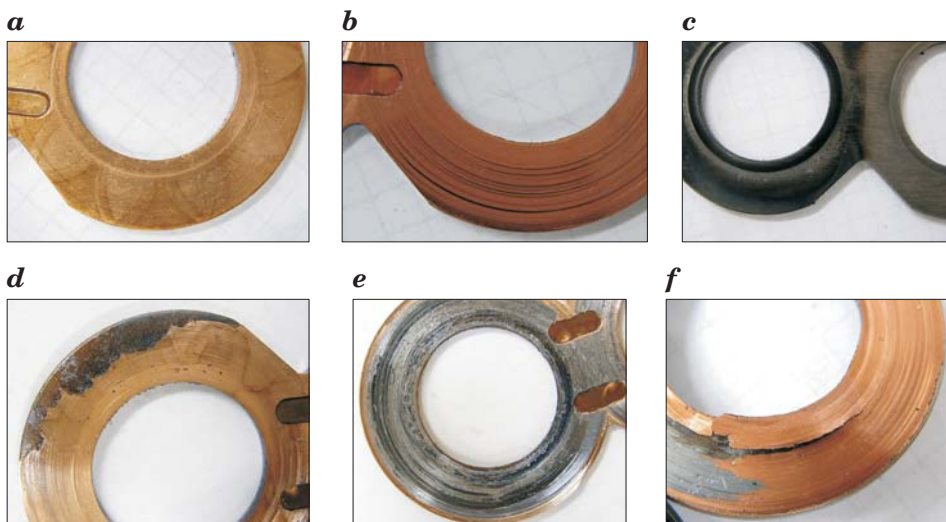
Resistance filler seals failures: *a* – resistance filler scratches under 16 μm , *b* – scratches over 16 μm , *c* – resistance filler scorch, *d* – torn filler surface off, *e* – seized surface of the resistance filler, *f* – copper coating defect
